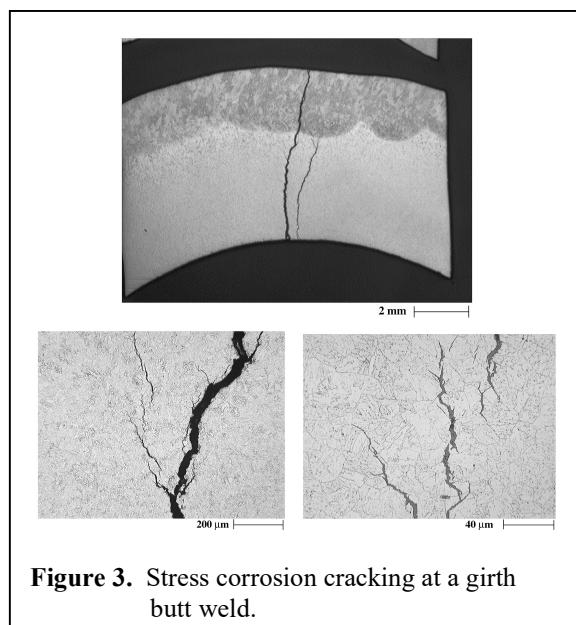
Stress corrosion cracking at a girth butt weld.
